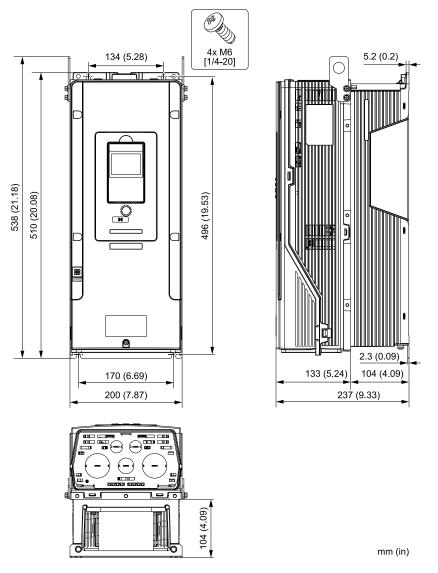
Exterior and Mounting Dimensions Diagram 4
